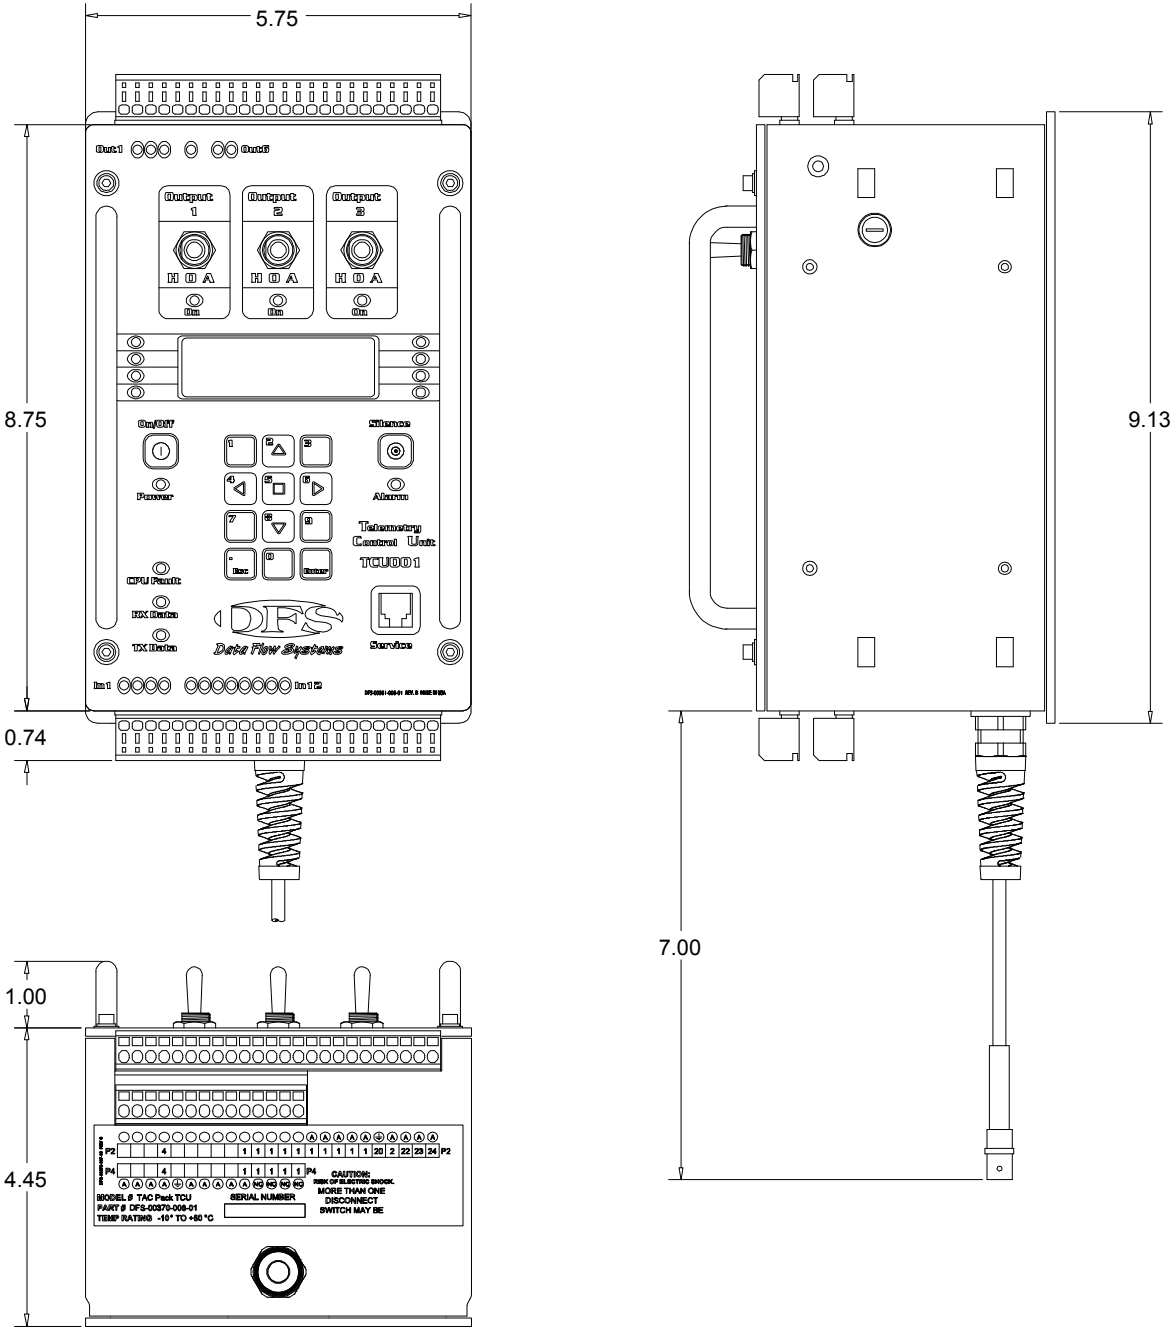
, "Dimensional drawing of the TAC Pack TCU"
